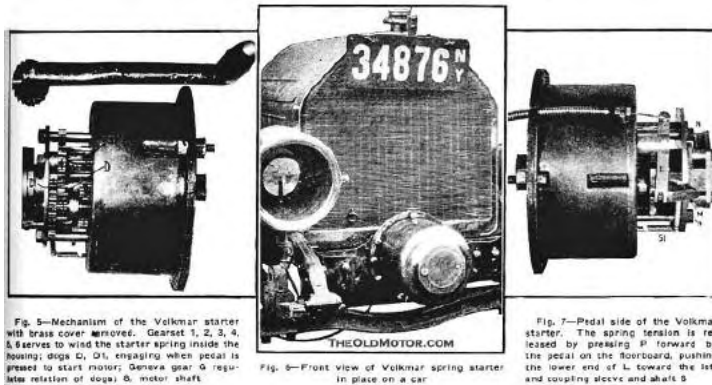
Mechanism of the Volkmar starter with brass cover removed. Gearset 1, 2, 3, 4, 5 serves to wind the starter spring inside the housing; dogs C, D, E engaging when pedal is pressed to start motor; Geneva gear G regulates rotation of dogs; S, motor shaft.
